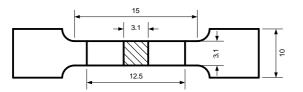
Dimension of standard tensile specimen No.7 JIS Z2201
